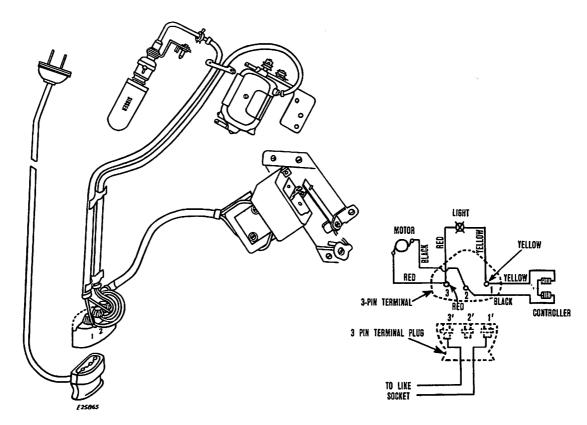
Wiring Diagram for BU107-C Motor on 24-67 Machine in Cabinet Set No. 40
